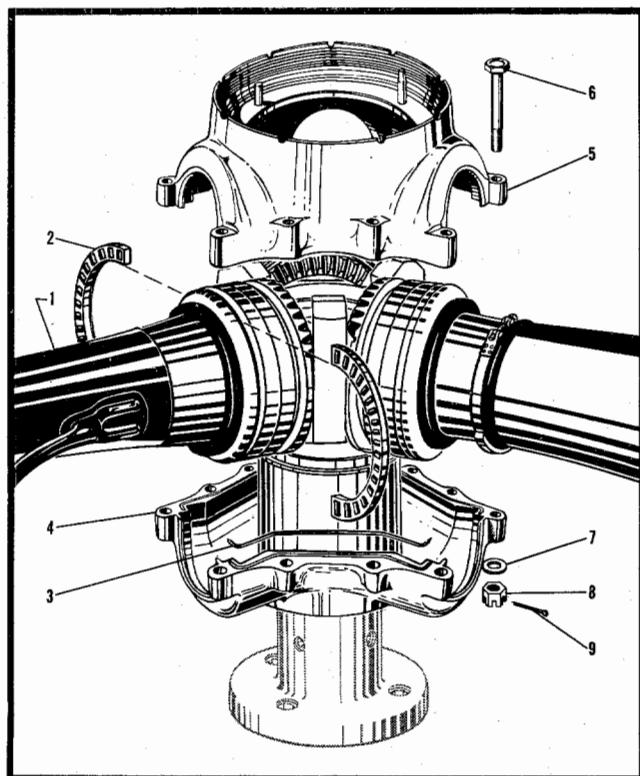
Assembly of Barrel Halves over Spider and Blade Parts
